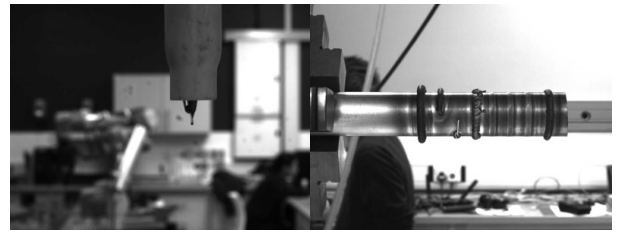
Left picture acquired by camera A attached to the welding torch, right picture acquired by camera B attached to the aluminium structure.
